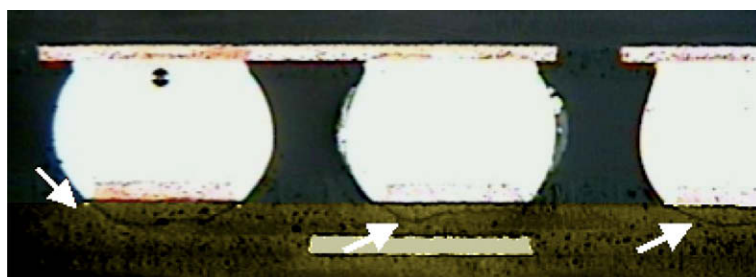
Cracked resin layer under pads for several solder joints, edge-bonded.
